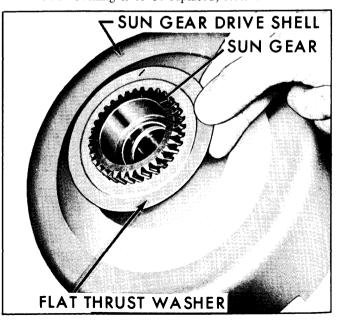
Removing Sun Gear to Drive Shell Rear Steel Thrust Washer
